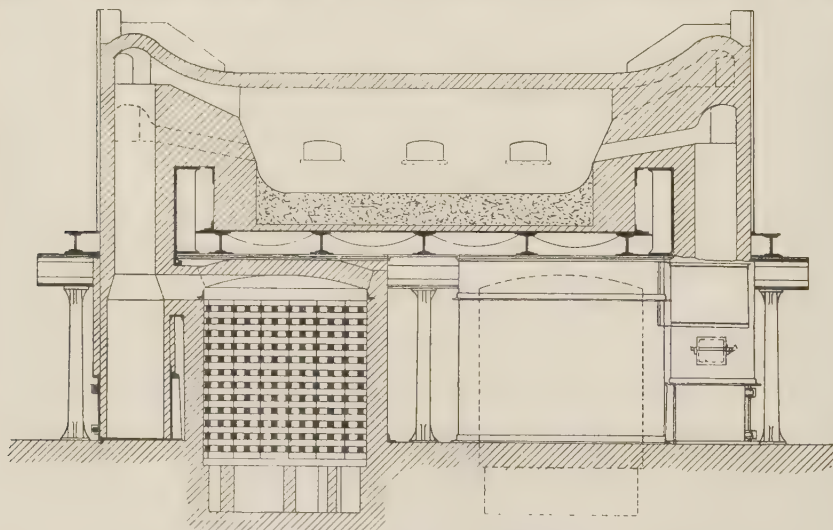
Duff Open-hearth Furnace with Improved Regenerators.
